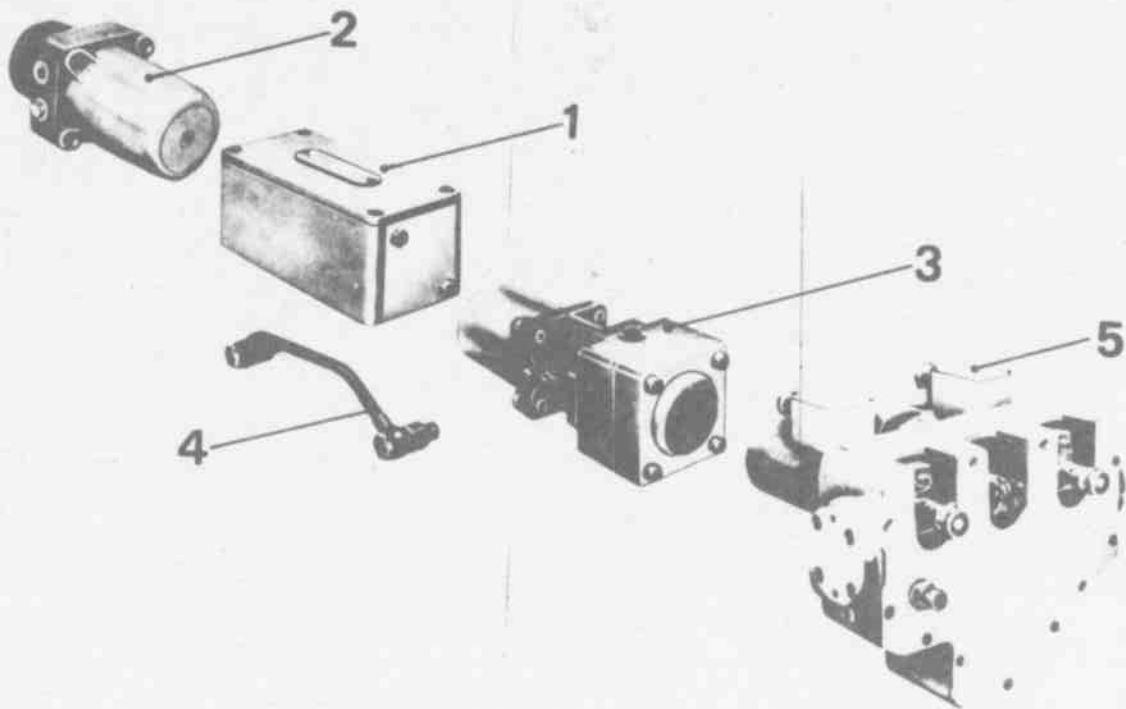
Exploded view of the control unit showing the various sub-assemblies
